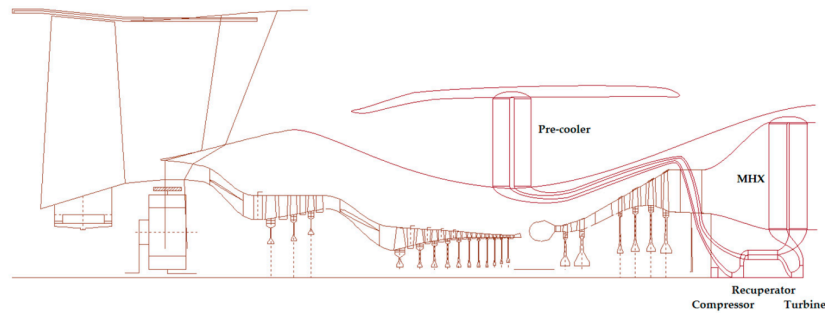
Mechanical design and basic component layout of a turbofan engine with a recuperated S-CO₂ bottoming cycle [19].
